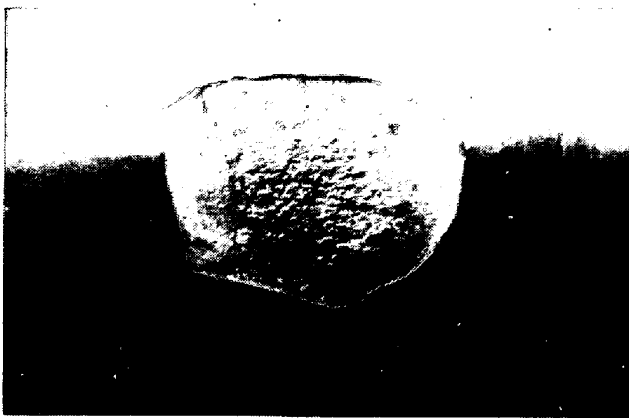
Surface spalling due to the rolling of cobbled sheet.
